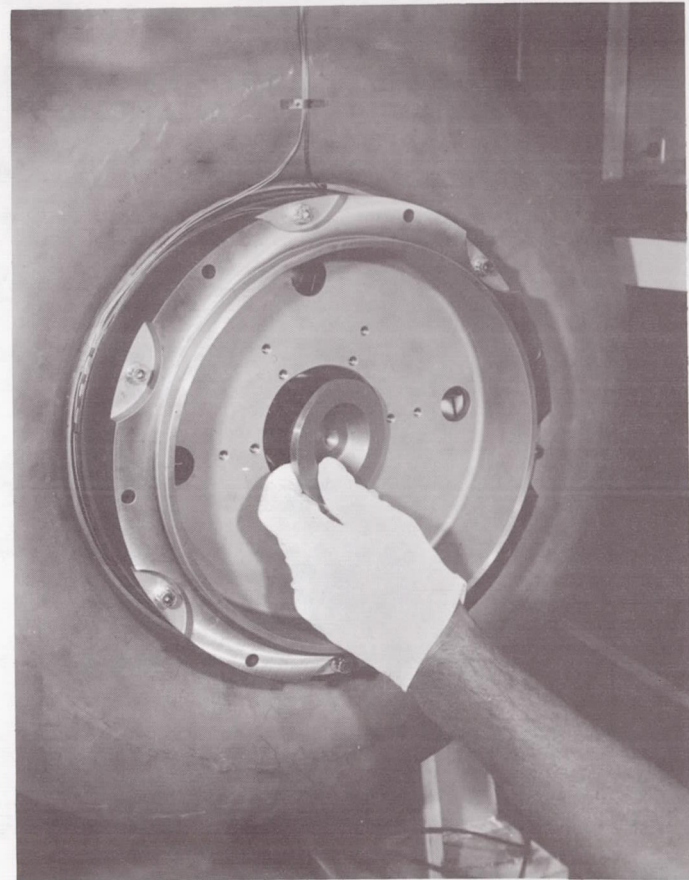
Installing Front Shipping Fixture Axial Load Adapter Into Turbine Wheel
